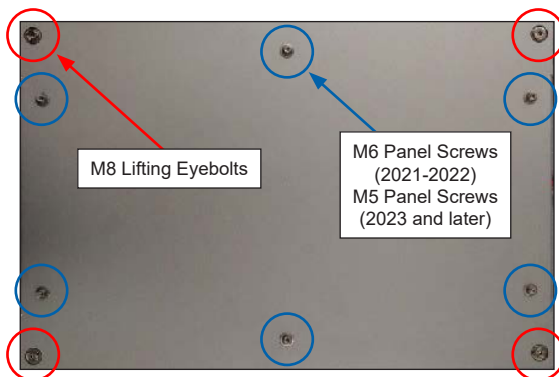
Attaching Points for M8 Lifting Eye-bolts, Top Pen View
